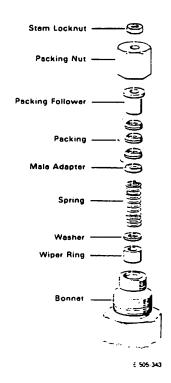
Standard Packing Spring Loaded TFE V-Ring
